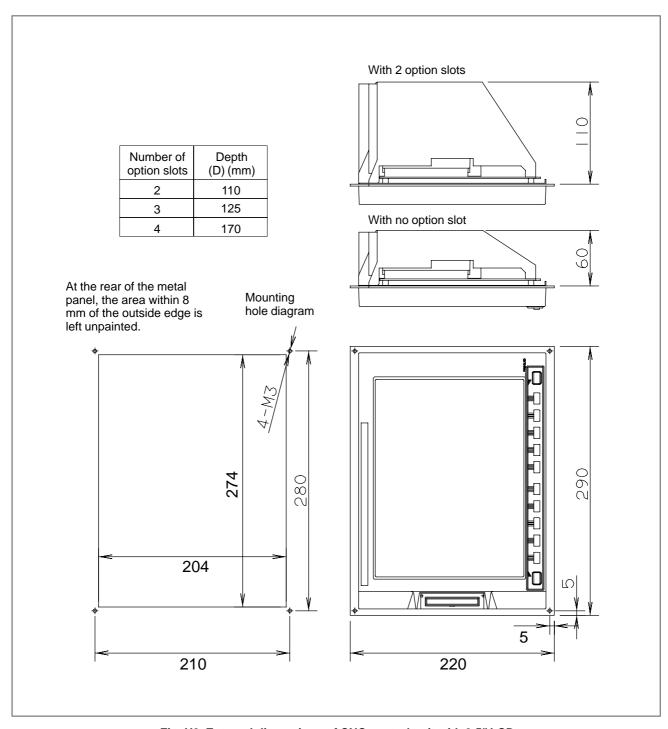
External dimensions of CNC control unit with $9.5^{\prime\prime}$ LCD
